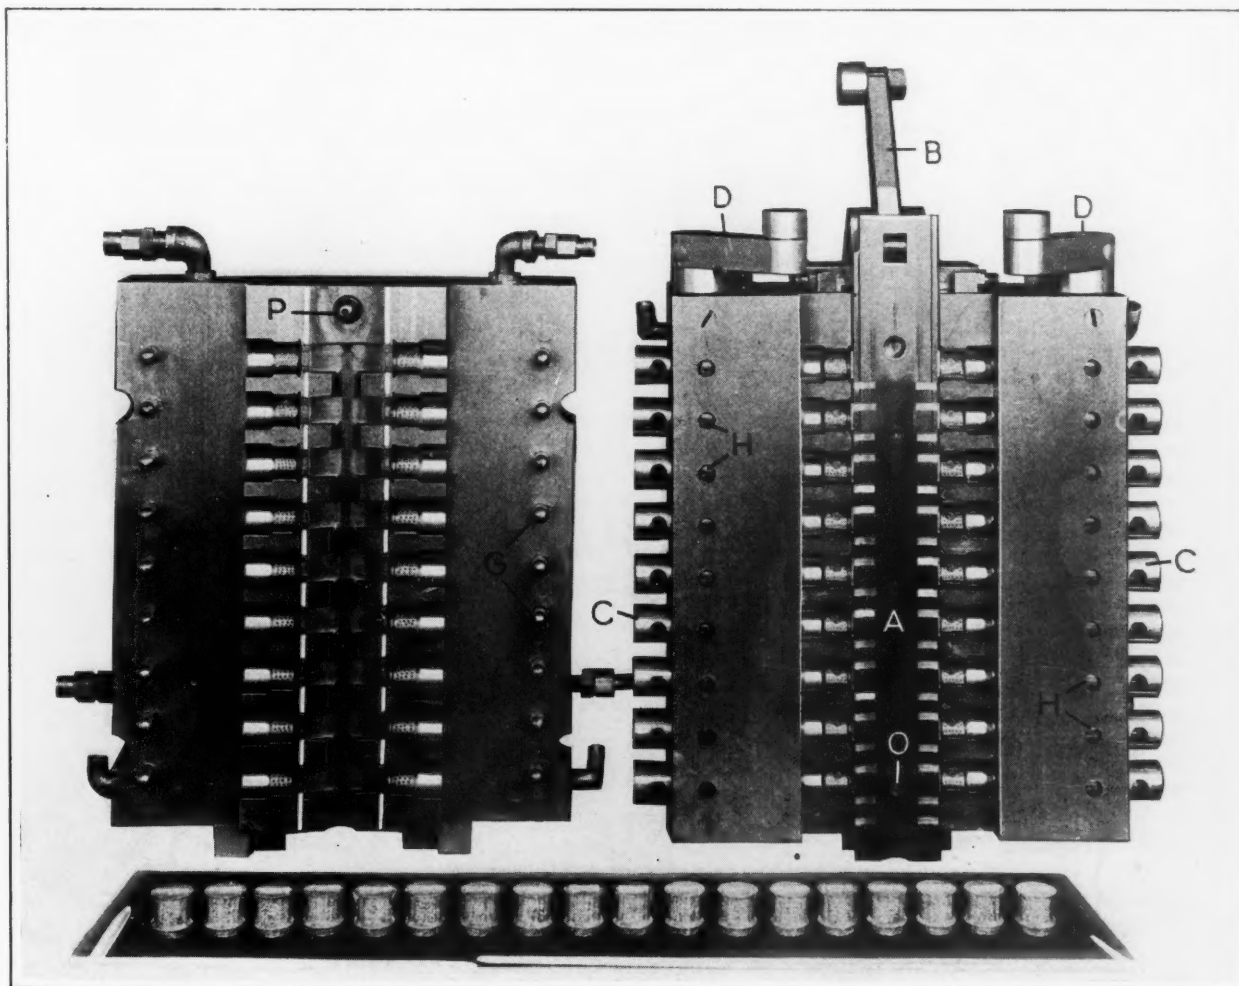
Another View of the Dies in Fig. 1, Showing the Slide that Cuts off the Sprue Metal in the Lowered Position
